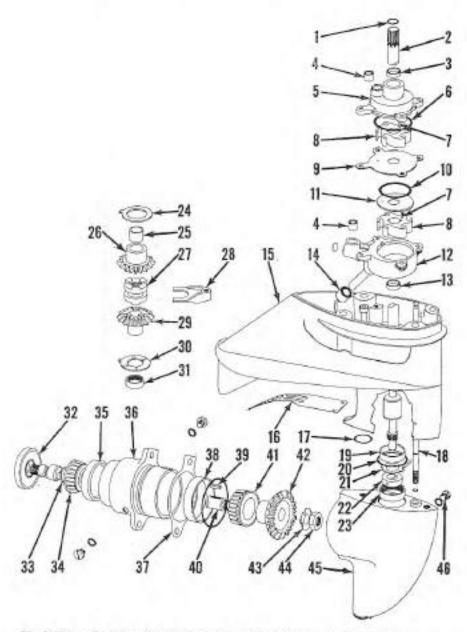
Exploded view of georcase housing, water pumps and associated parts.
